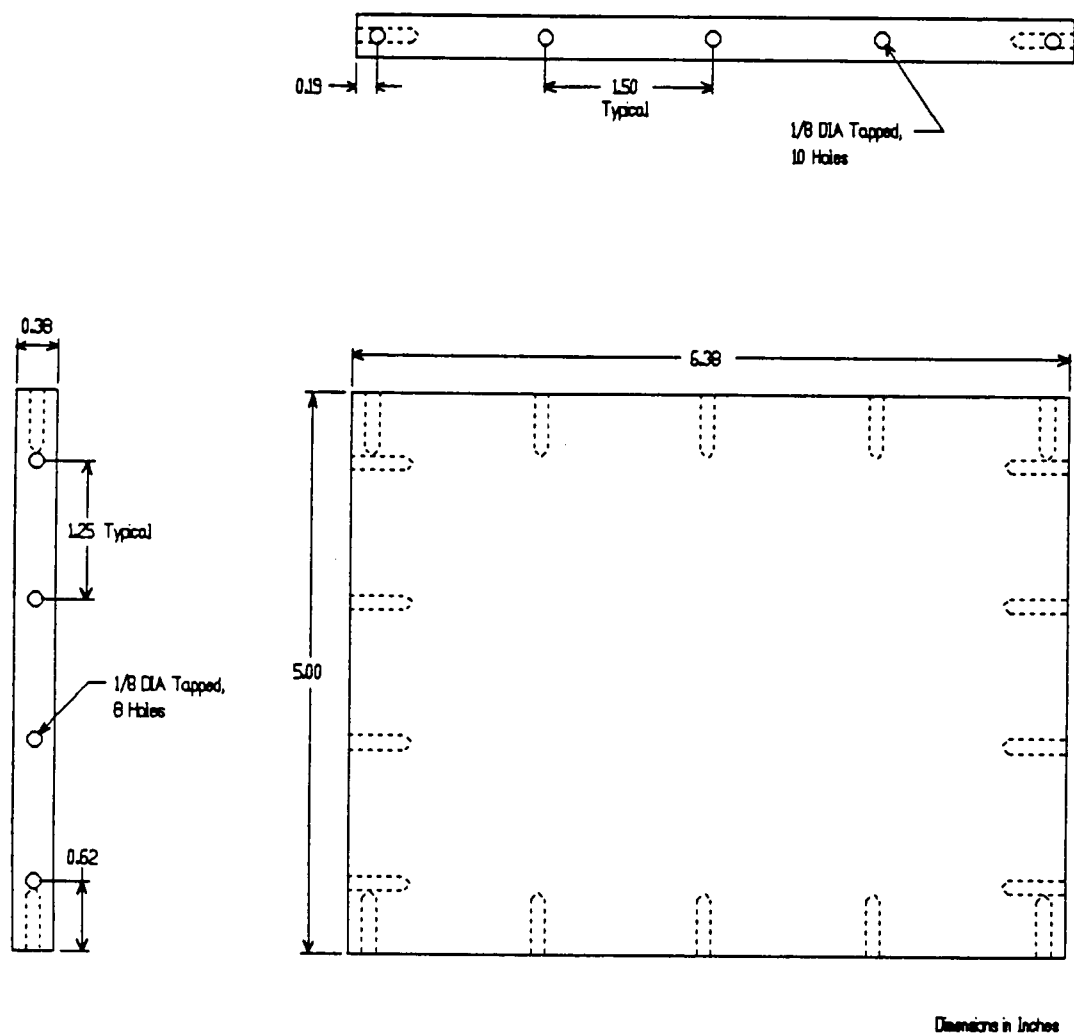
Heated Cavity Apparatus, Plexiglass Wall
